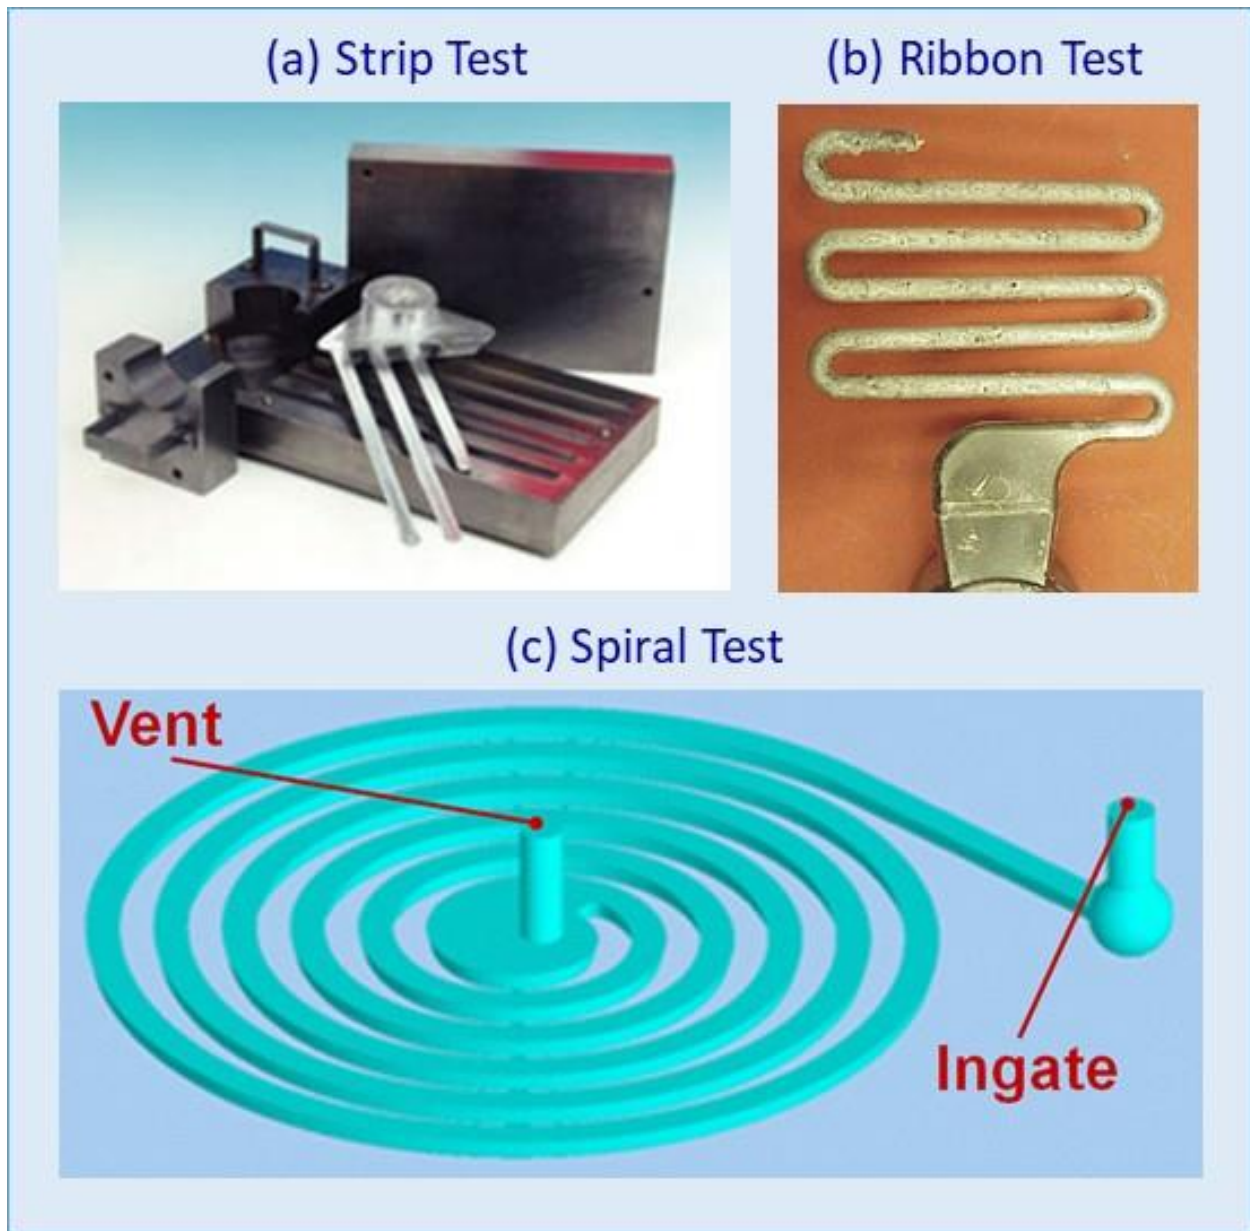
Design options for reference dies to determine the fluidity/viscosity for producing fully-formed castings: (a), strip test [ref. 22]; (b), ribbon test [ref. 36]; (c), spiral test [ref. 37]. Note that the strip test configuration is most readily adaptable to die casting.
